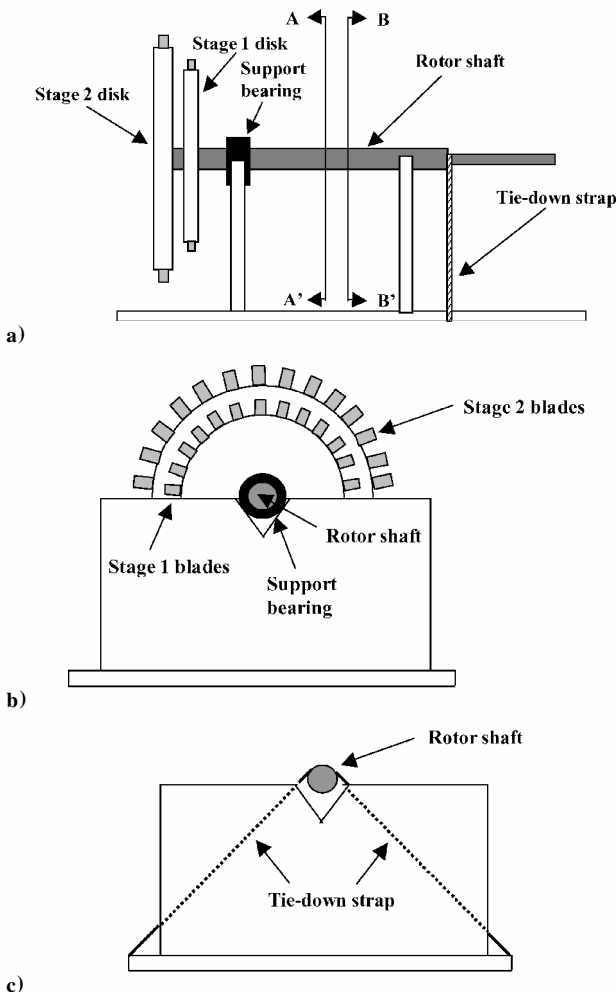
Turbopump blisk and shaft supported in test stand. a) Stage 1 blades (smaller) and stage 2 (larger) blades are shown at the left end of the blisk assembly. Note the bearing that is seated in the left-hand support; b) section A-A'; and c) section B-B'.
